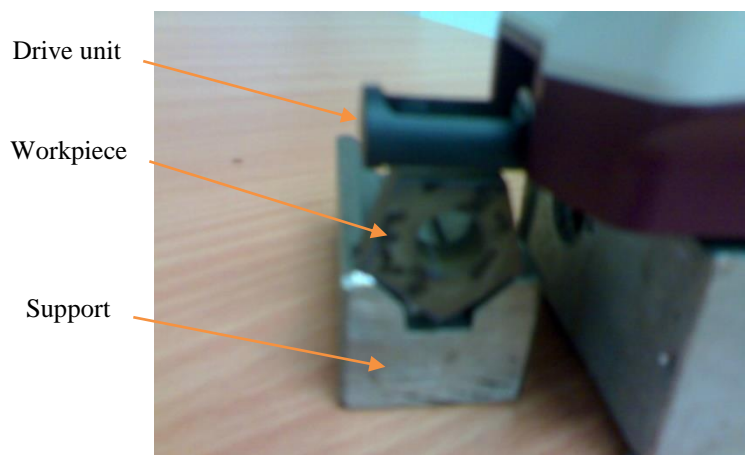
Front view of the measurement drive unit on the workpiece surface
